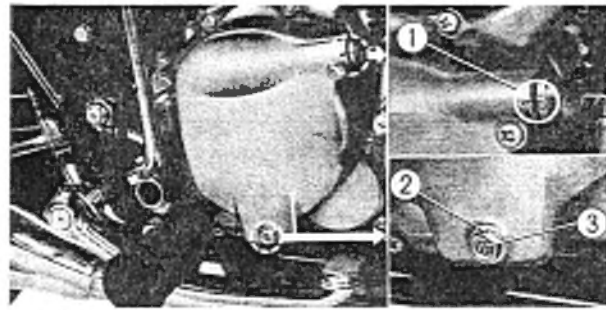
① Matching mark ② Lock nut ③ Clutch adjuster
